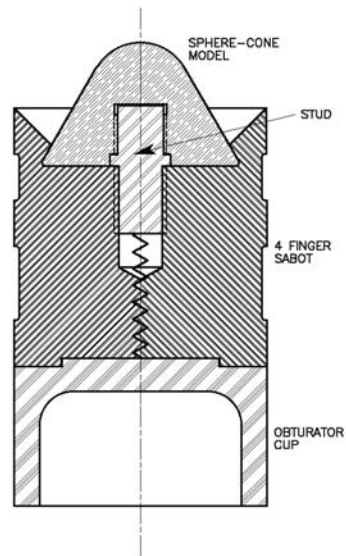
Section drawing of launch package for open front sabots. Shown with revision A (REV A) obturator cup.
